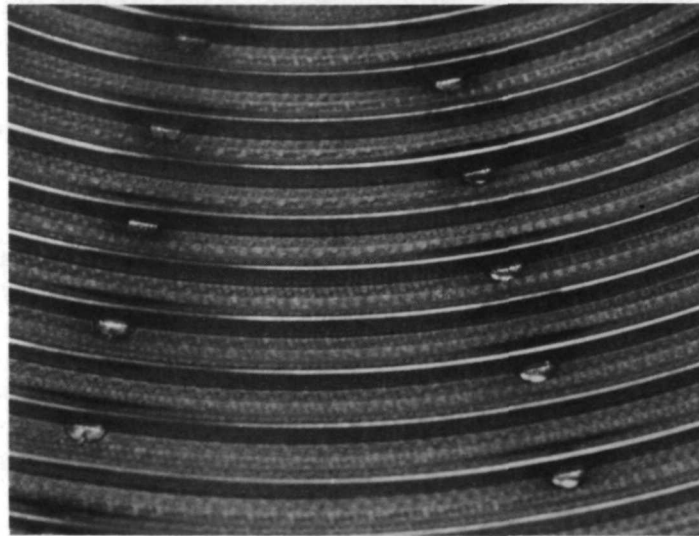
Close Up of Rings Welded Into Slots in Screw Heads
